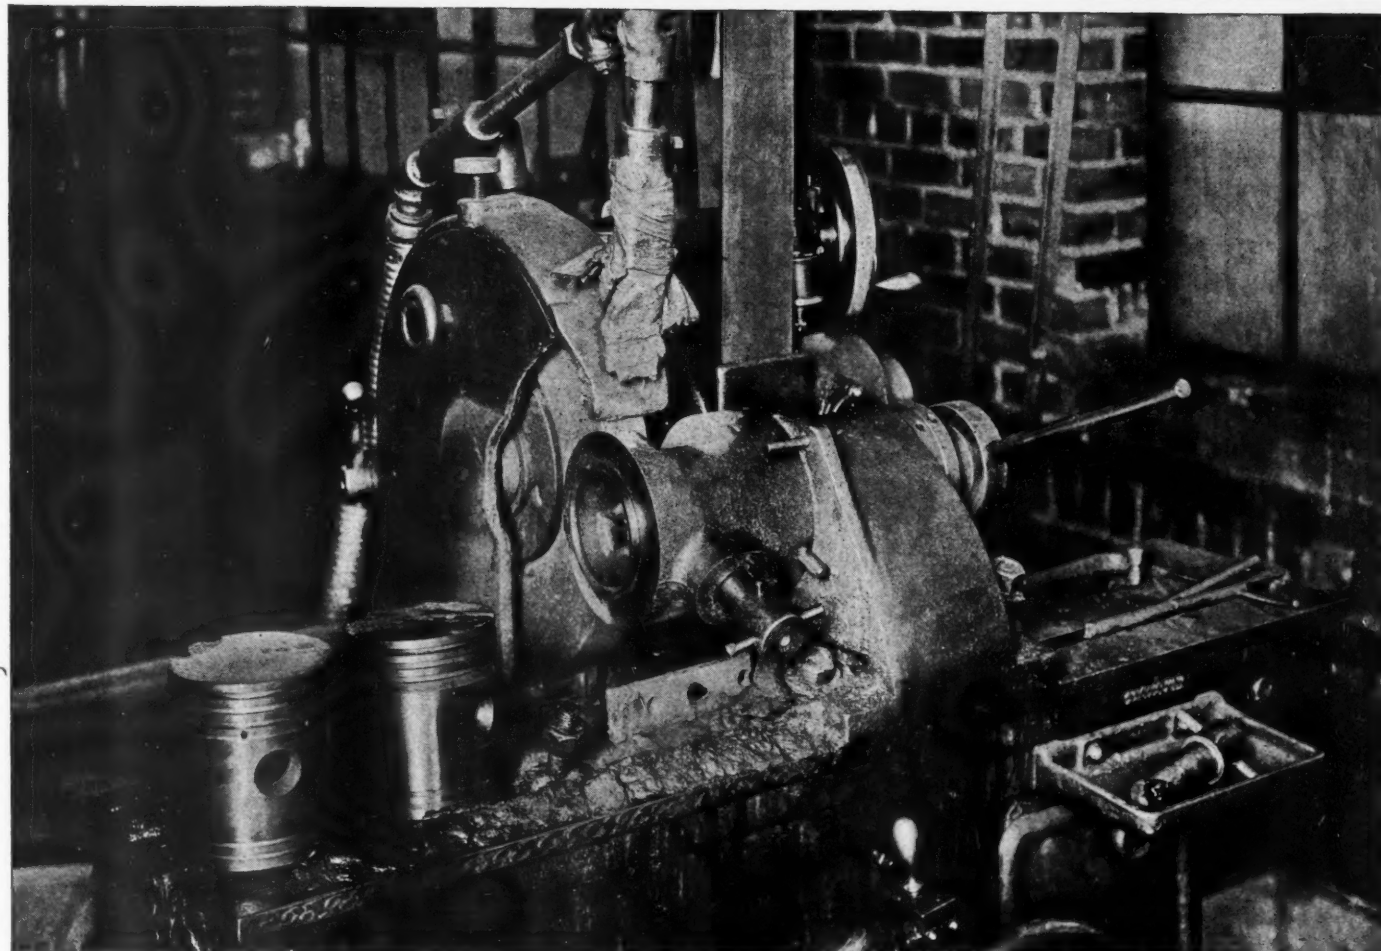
Above—Inspecting for concentricity of piston pin hole. This is held to 0.00015 in. Fig. 7—Below—Relieving piston pin boss. This is a grinding operation with piston held and located from inside
